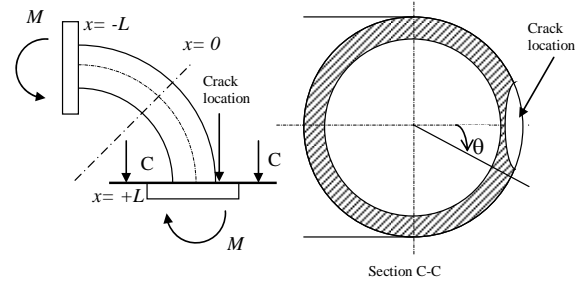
Part-through crack in a welded flange joint in a curved pipe
